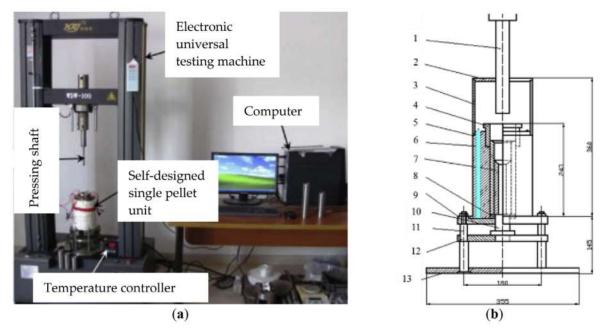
One briquette making setup test device; (b) Self-designed single pellet unit: (1) Pressing shaft, (2) guide device, (3) supporting cylinder, (4) inner sleeve, (5) heating sleeve, (6) heating device, (7) briquetting mold, (8) mold block, (9) mold supporter, (10) back stop, (11) supporting column, (12) back stop supporter, and (13) foundation support. (Source: Wang, Wu, & Sun, 2018)
